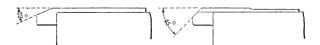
Chucking Reamer Blade for Gray Iron and Bronze
